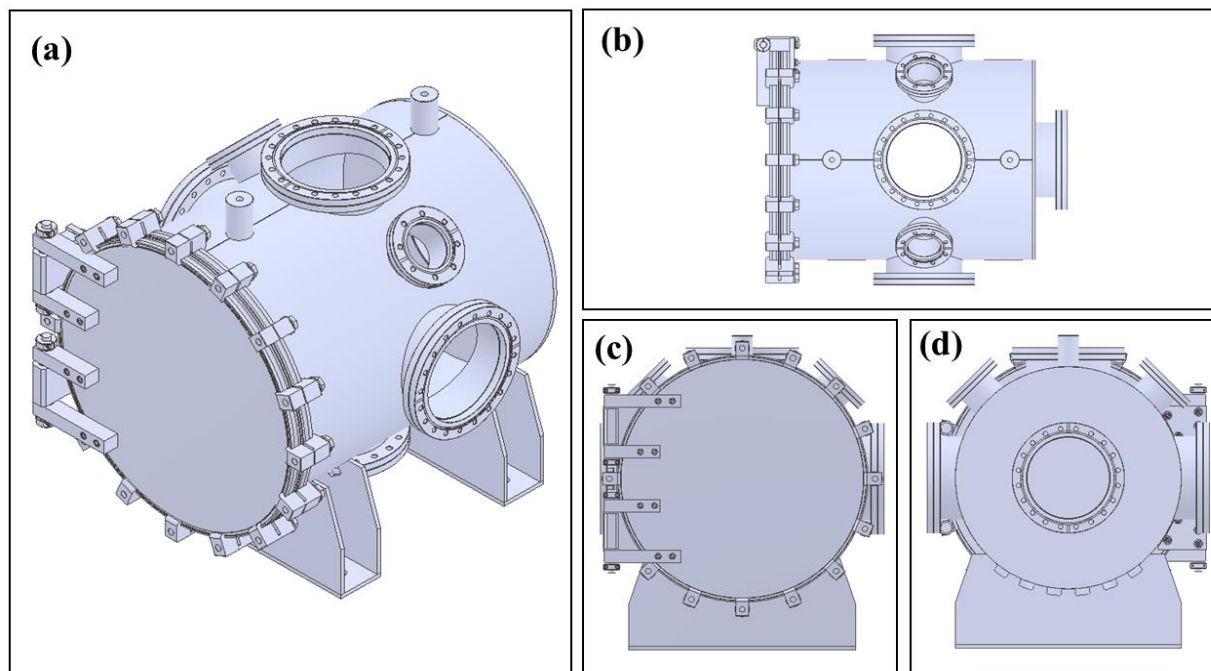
Design of the vacuum chamber used for the cylindrical sputtering system: (a) isometric view, (b) top view, (c) front view, and (d) back view.
